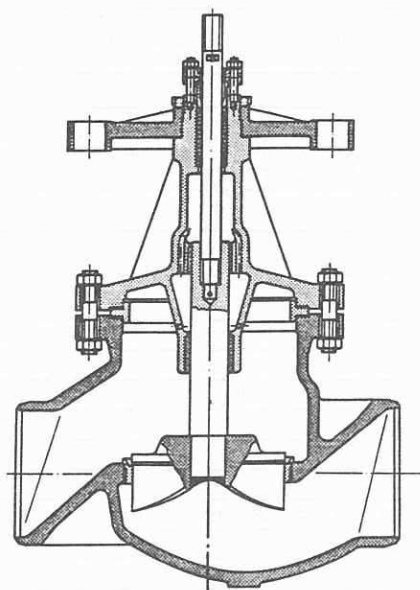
Globevalve DN200 with weldends, standard bonnet, V-Port plug, single seat
